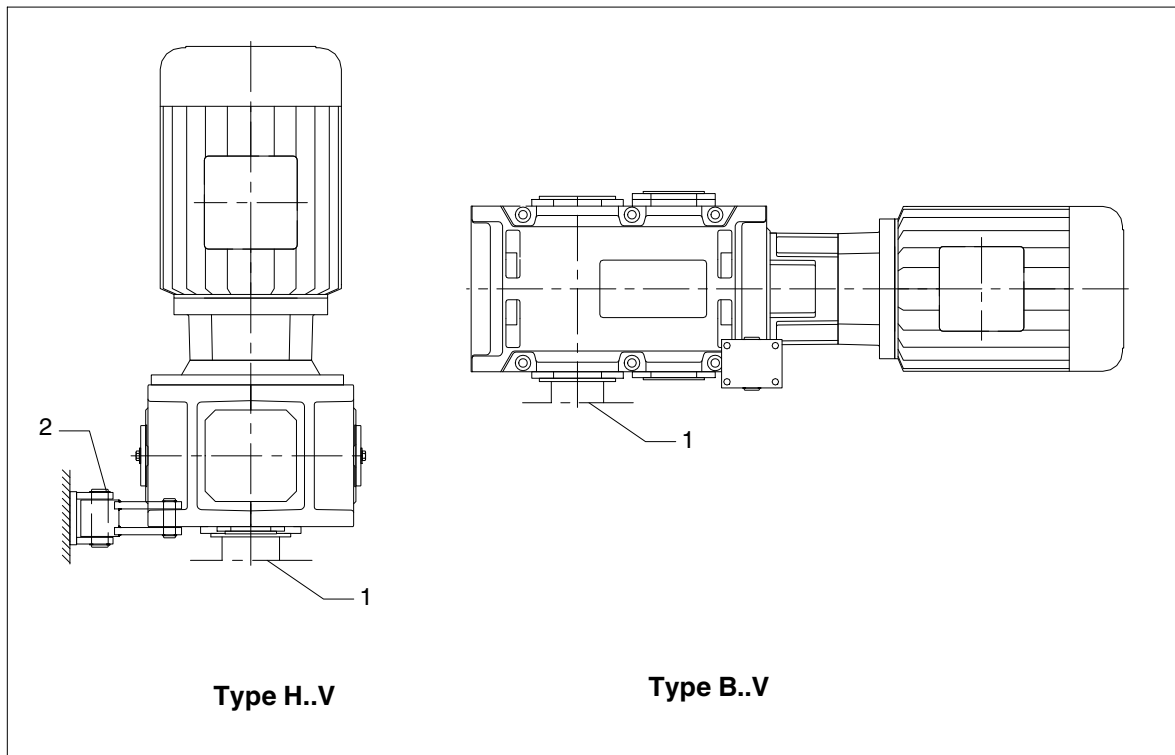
Torque arm for gear-unit housing of types H..V and B..V
